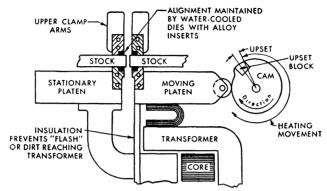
Diagrammatic view of a flash welder (Courtest of: P. R. Mallory and Co., Inc.)
